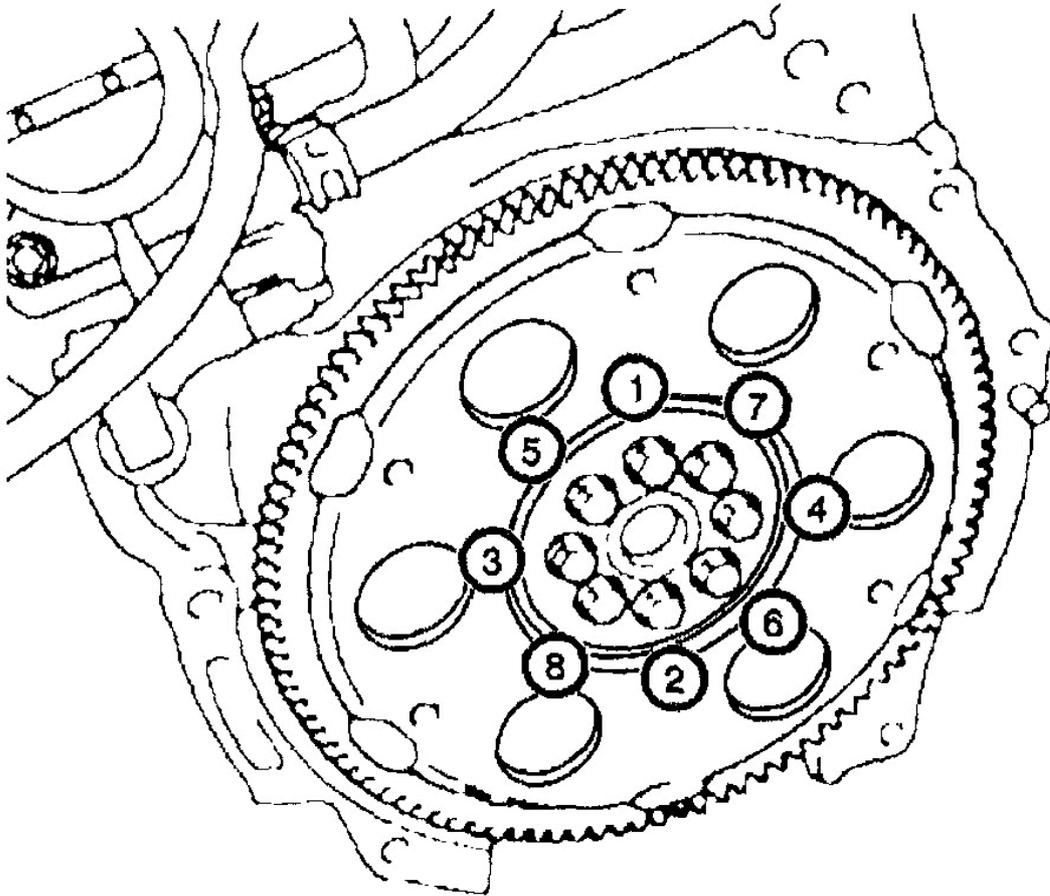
Cleaning And Inspecting Engine Flywheel
